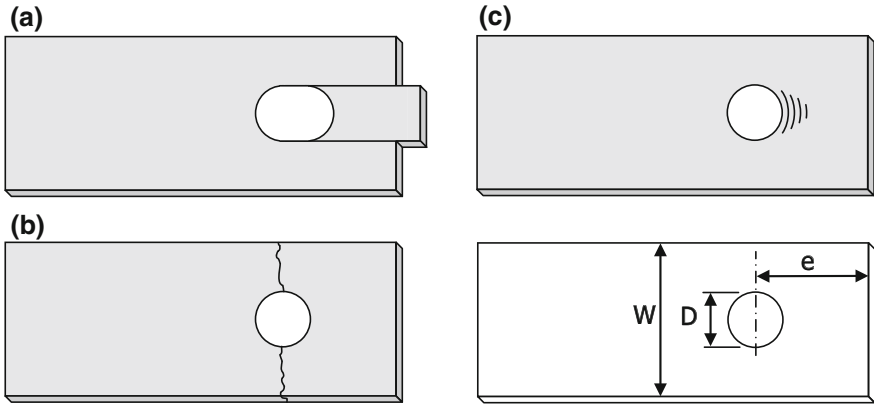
Typical failure modes of pin-loaded holes; shear-out (a), net-section (b) and bearing failure (c)
